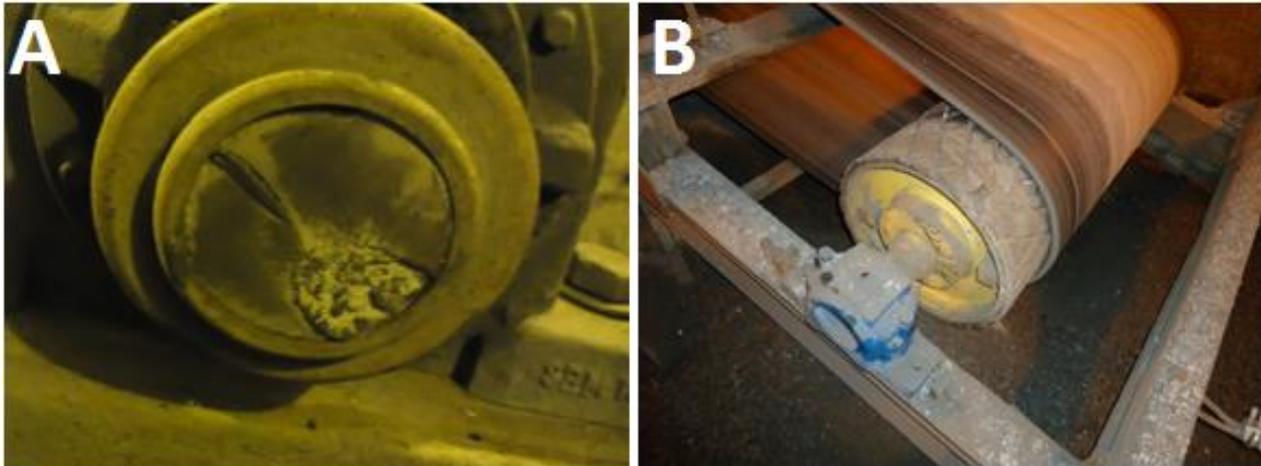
(A) Fracture of the shaft attached to the bearing (B) Drum and bearing after maintenance.
